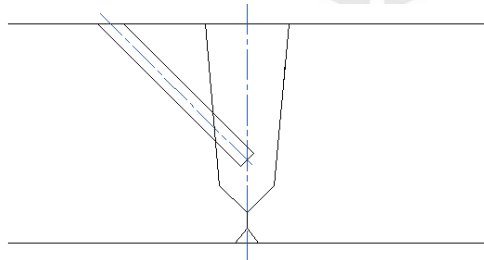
$\Phi 1.5$ mm FBH machined to weld centerline
